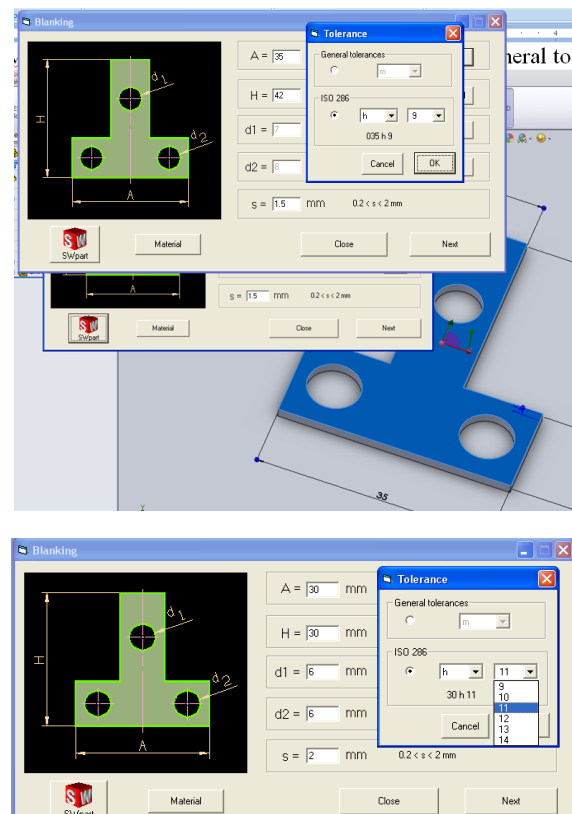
Parametric input of dimensions of finished part and tolerance of given measures, SolidWorks2015®
